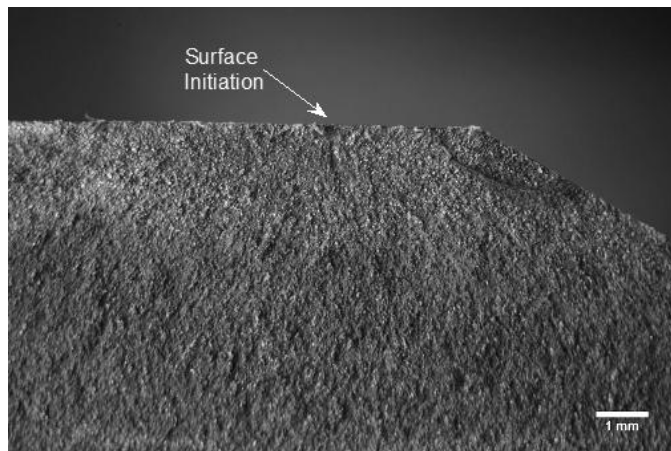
FRACTURE FACE OF SHOT PEENED + SCC + ACTIVE CORROSION SAMPLE.
